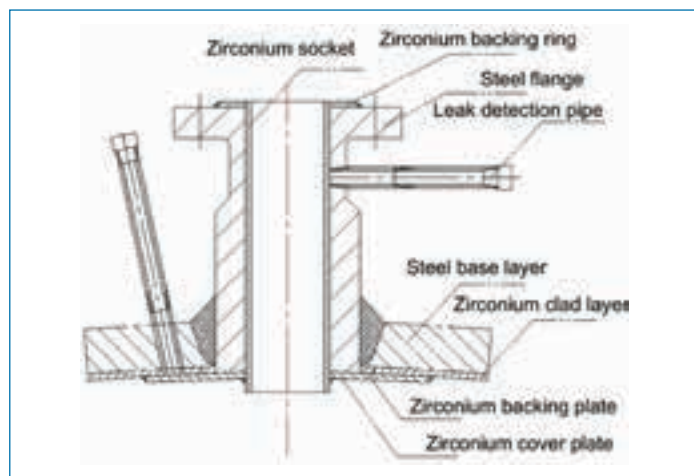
The welding scheme for the connecting pipe of small diameter to the cylinder.
